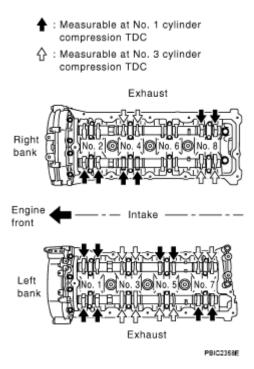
Locating Valve Clearances Mark Location Courtesy of NISSAN MOTOR CO., U.S.A.
